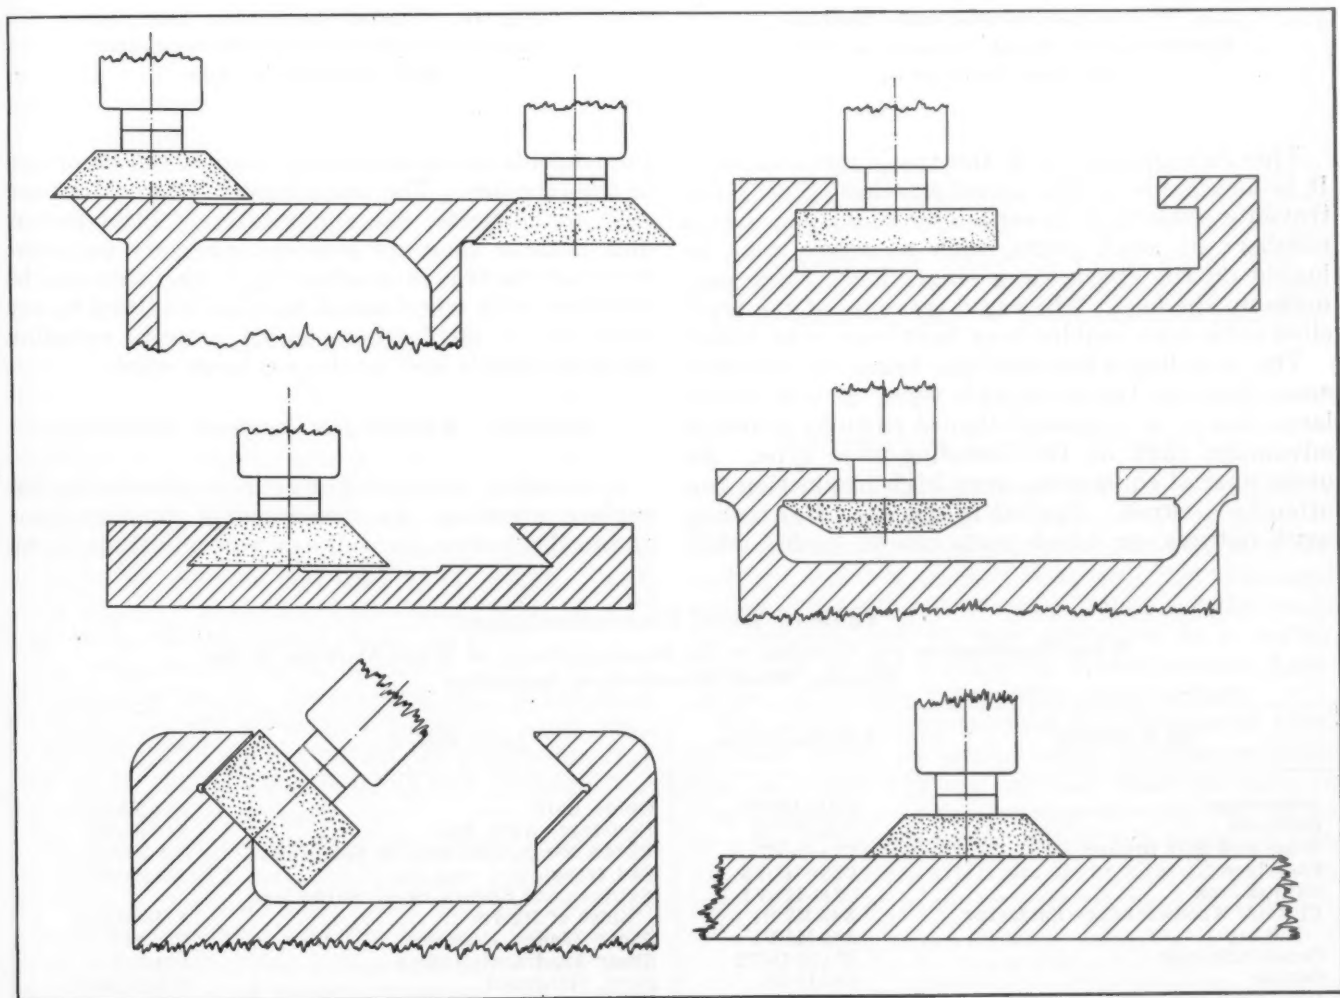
Typical Operations Performed on a Mattison Vertical-spindle Reciprocating-table Grinding Machine
